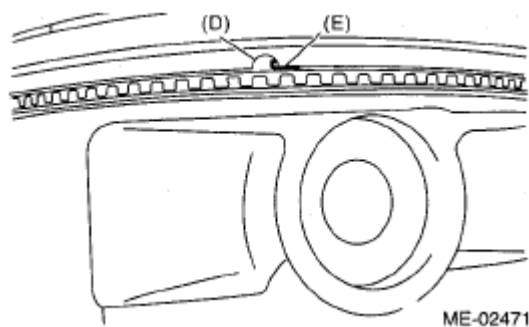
Aligning Upper Rail Spin Stopper With Piston Side Surface Hole
